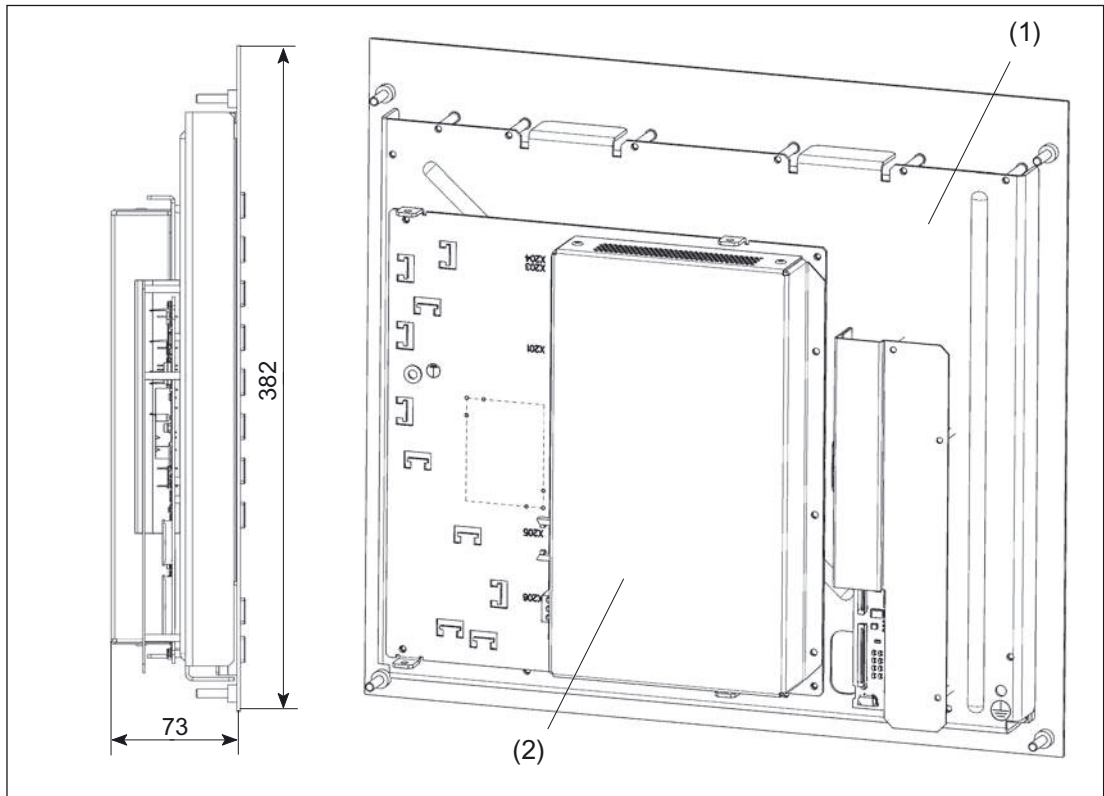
Example: Side and rear views of operator panel front with videolink receiver installed (for mounting see Chapter "Distributed Configuration with Videolink Receiver")
